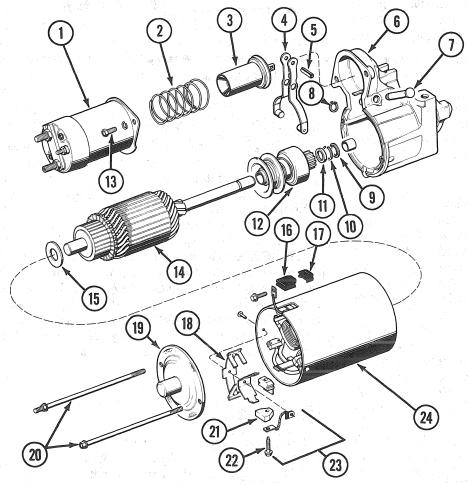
F-1 Four-Cylinder Engine Starter Motor System
